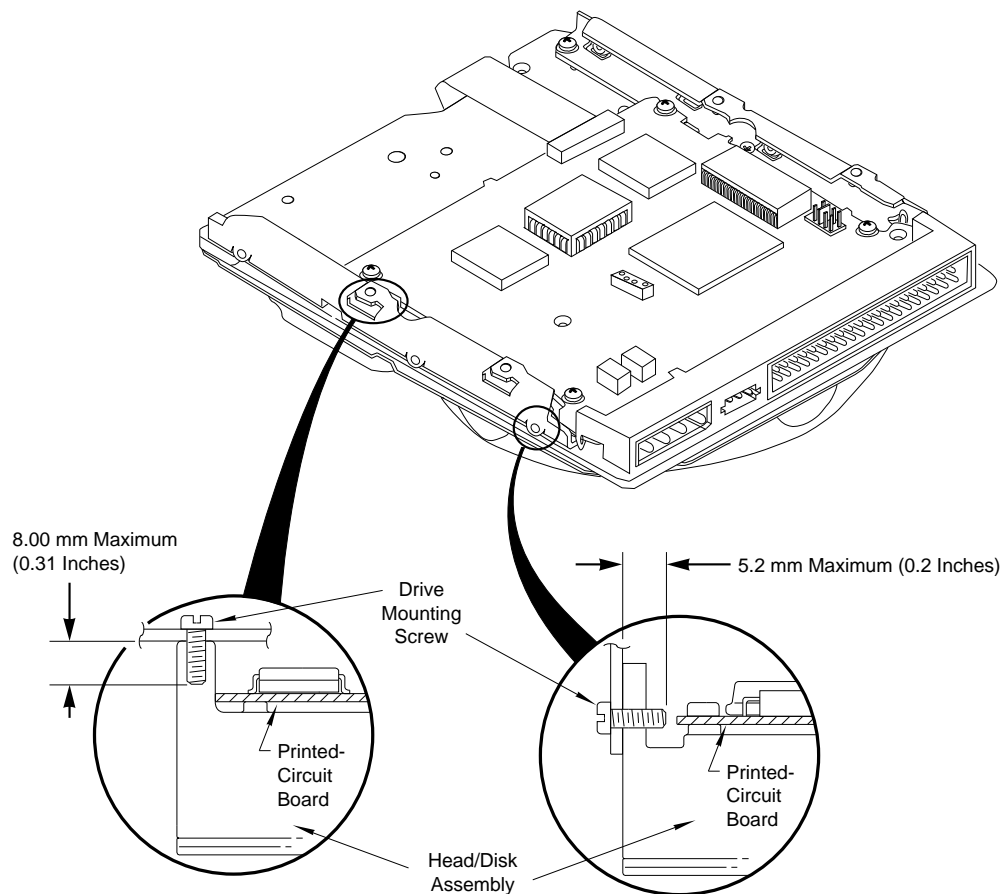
Mounting Screw Clearance for Quantum Fireball™ (One-Disk) Drive
